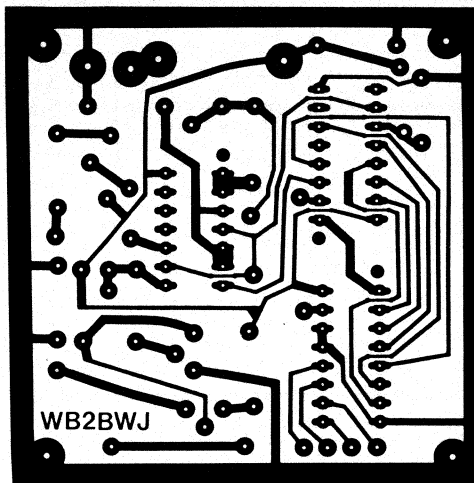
PC board layout and parts placement of the CW identifier. Kits are available (see text).
